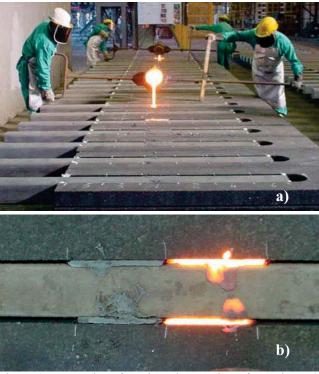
Examples of section-wise pouring of cast iron. a) Section 1 being poured; b) Section 2 just poured.
